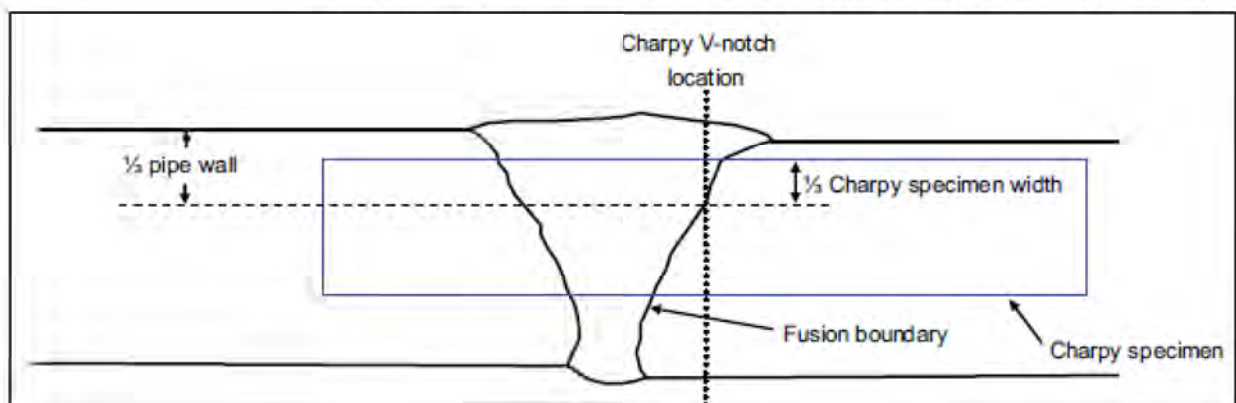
Charpy V-Notch Impact Specimen Location for Heat-Affected Zone Toughness Test for a Butt Welding Procedure Qualification
